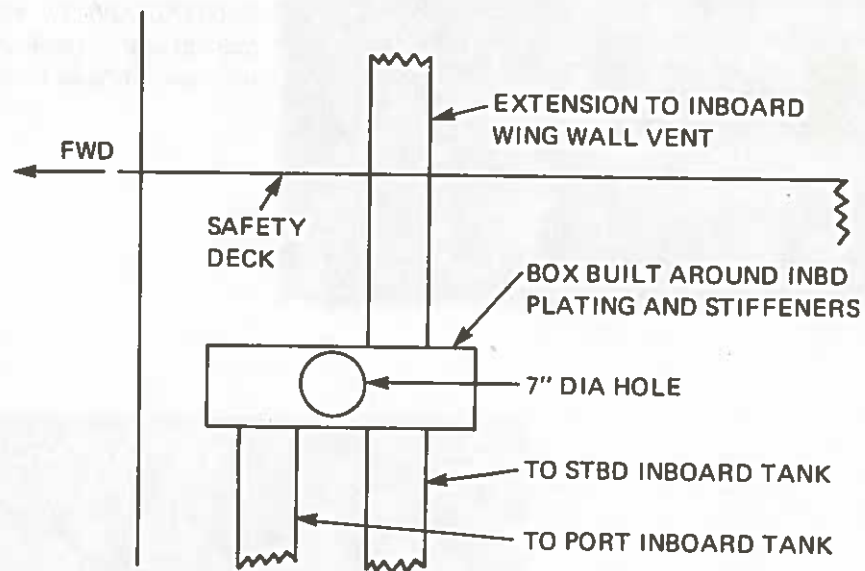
A. Inboard Tank Assemblies in Tanks 4, 8, and 12.
